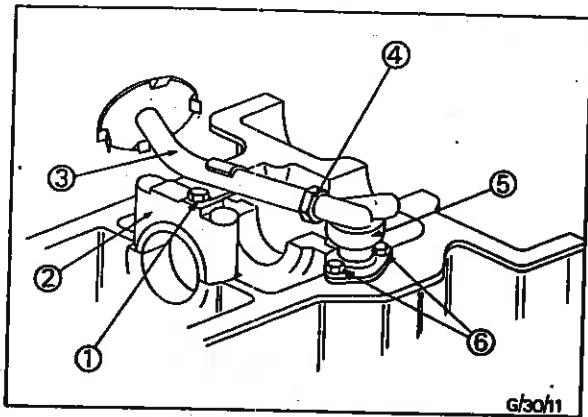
Oil Pump Removal/Replacement - 2722, 2723, 2725 and 2726T Engines Not Fitted with High Inclination Oil Pans
